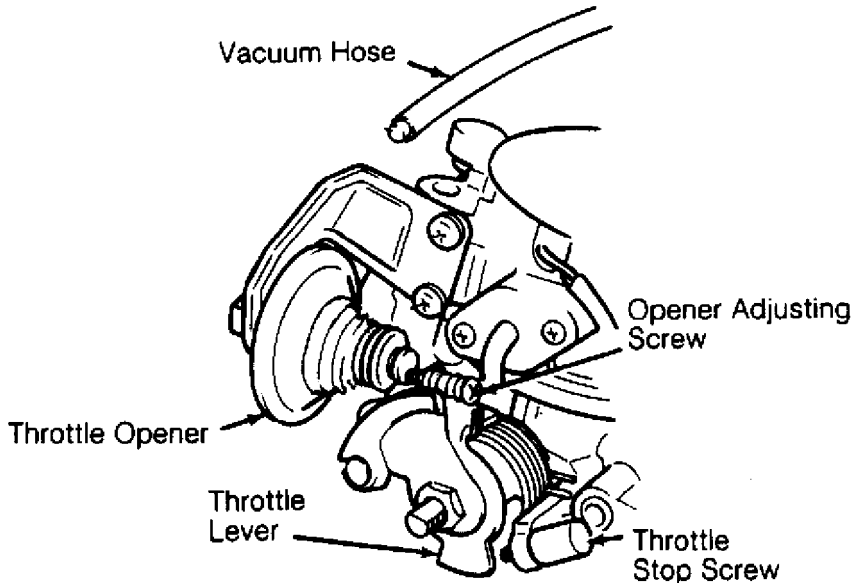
Adjusting Throttle Opener (Samurai & Sidekick TBI)
